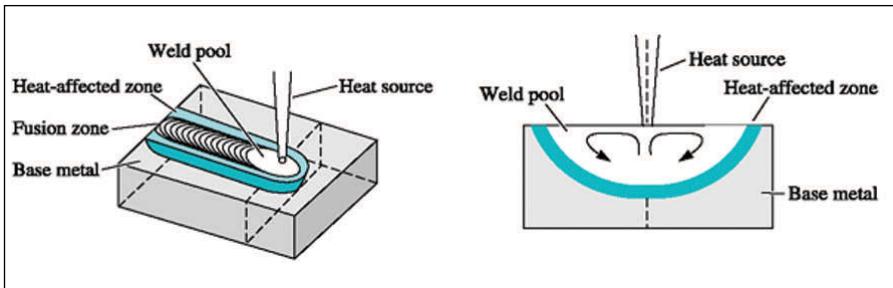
A schematic of the fusion welding process is shown at left and a transverse cross section, perpendicular to the direction of welding, is shown at right (Ref. 2).
